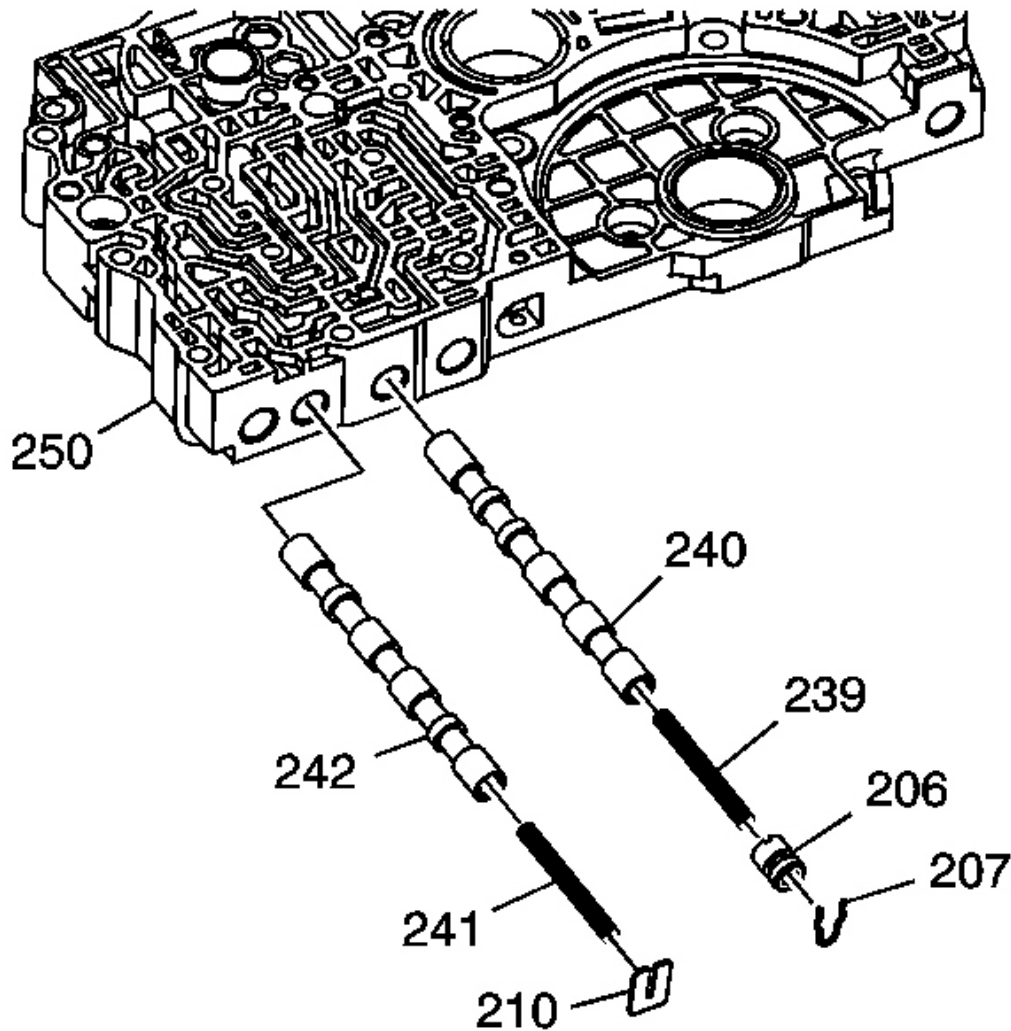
Main Control Valve Body, Spring Retainer, Shift Valve A, Bore Plug & Retainer Clip
